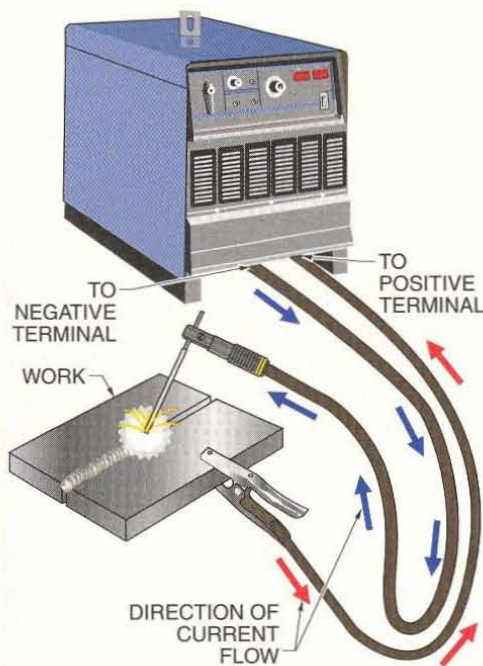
DCEN current, in which electric current flows from the negative terminal of the welding machine, moves along the wire or cable to the electrode, through the work and then returns to the positive terminal, is commonly used for SMAW.
